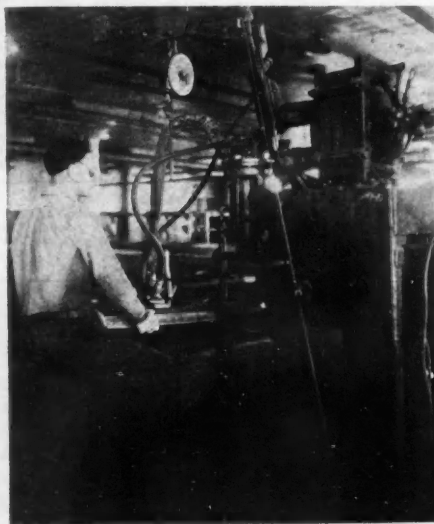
AN OBLIQUE SPOT-WELDING JOB
